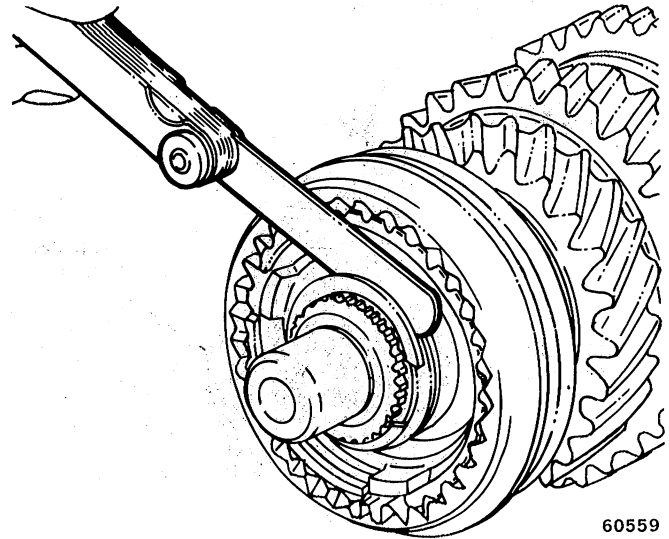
B-66 Checking Mainshaft Geartrain End Play
